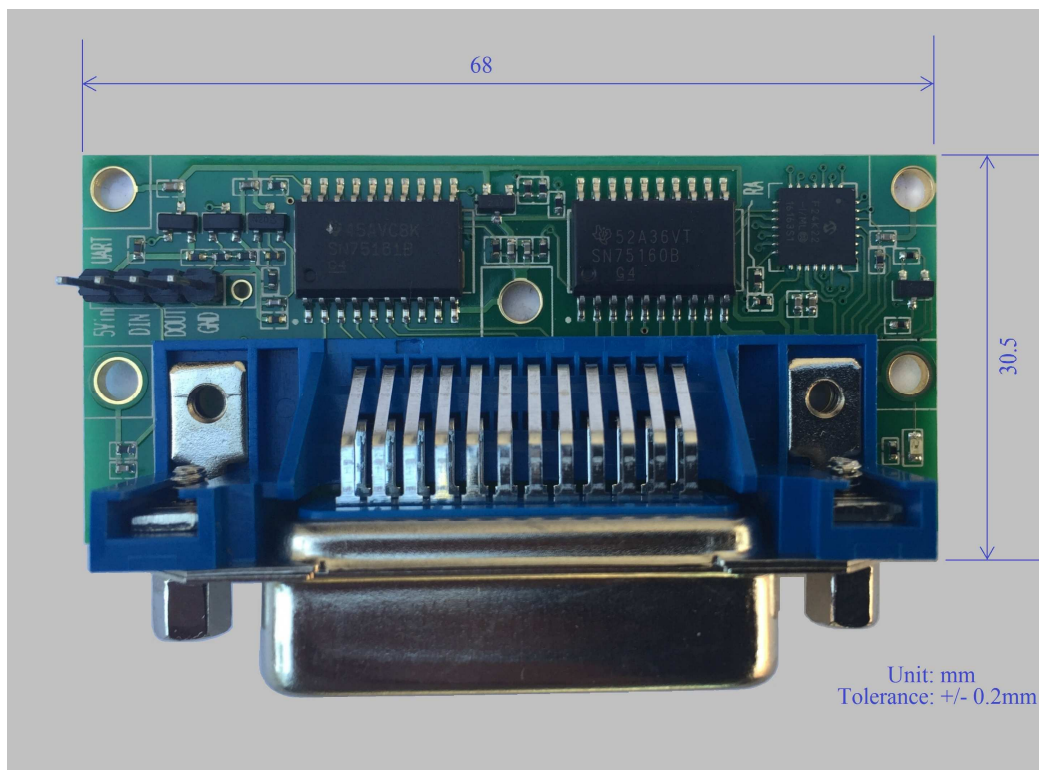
GPIB to UART Module Mechanic Size (top view)
